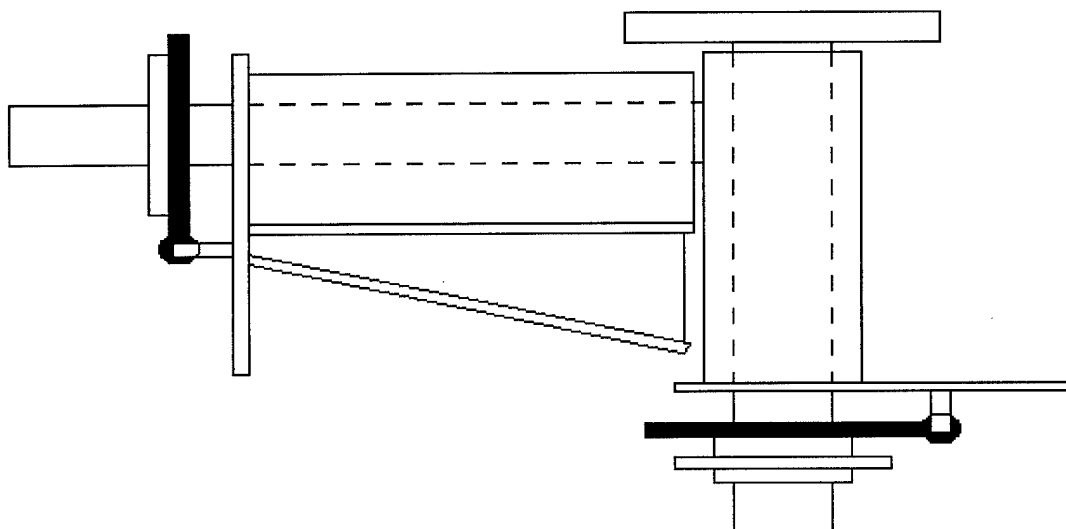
Schematic drawing of an optimized German equatorial mount with large shafts, short bearing distances, and short distance from point of weight to polar axis. Axis gearing shown in solid blocks and dashed lines indicate shafts in housings.
